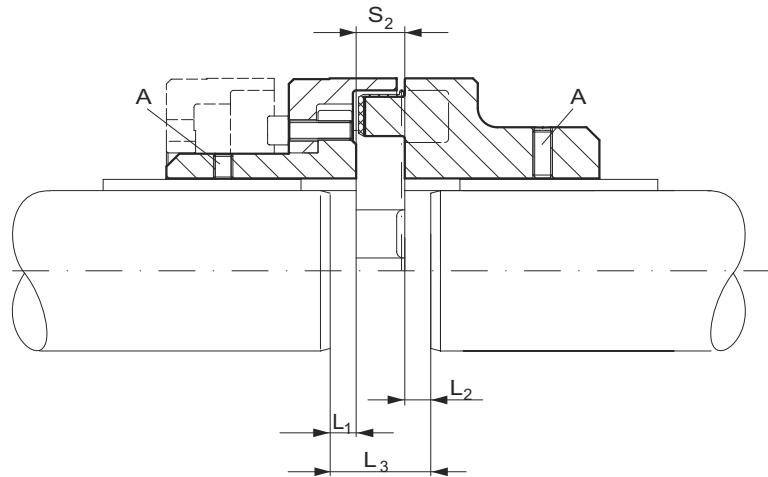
Mounting dimensions of the Nor-Mex E coupling
